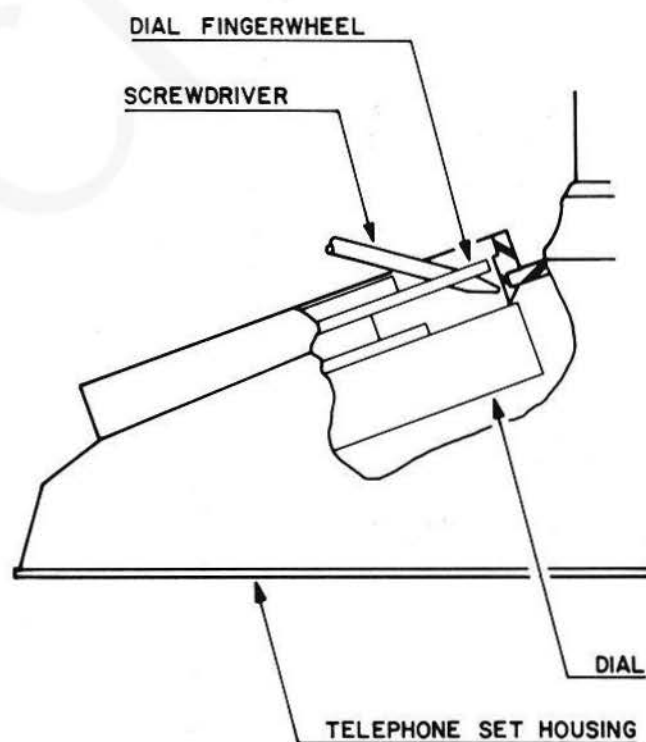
(b) — Installing Housing Assembly, Chart 1, Step 6
